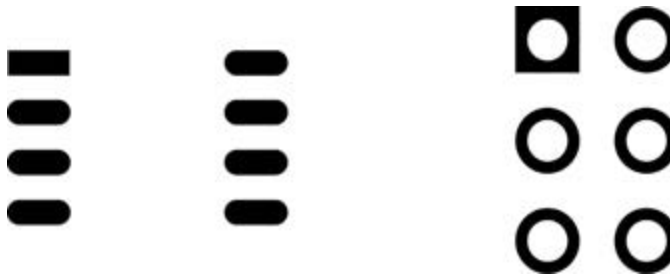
Unique pin 1 pads for a surface-mount (left) and a through-hole (right) component
